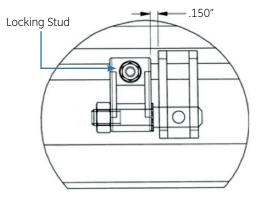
View to show gap between locking pin bridge and "U" fork on the door.
